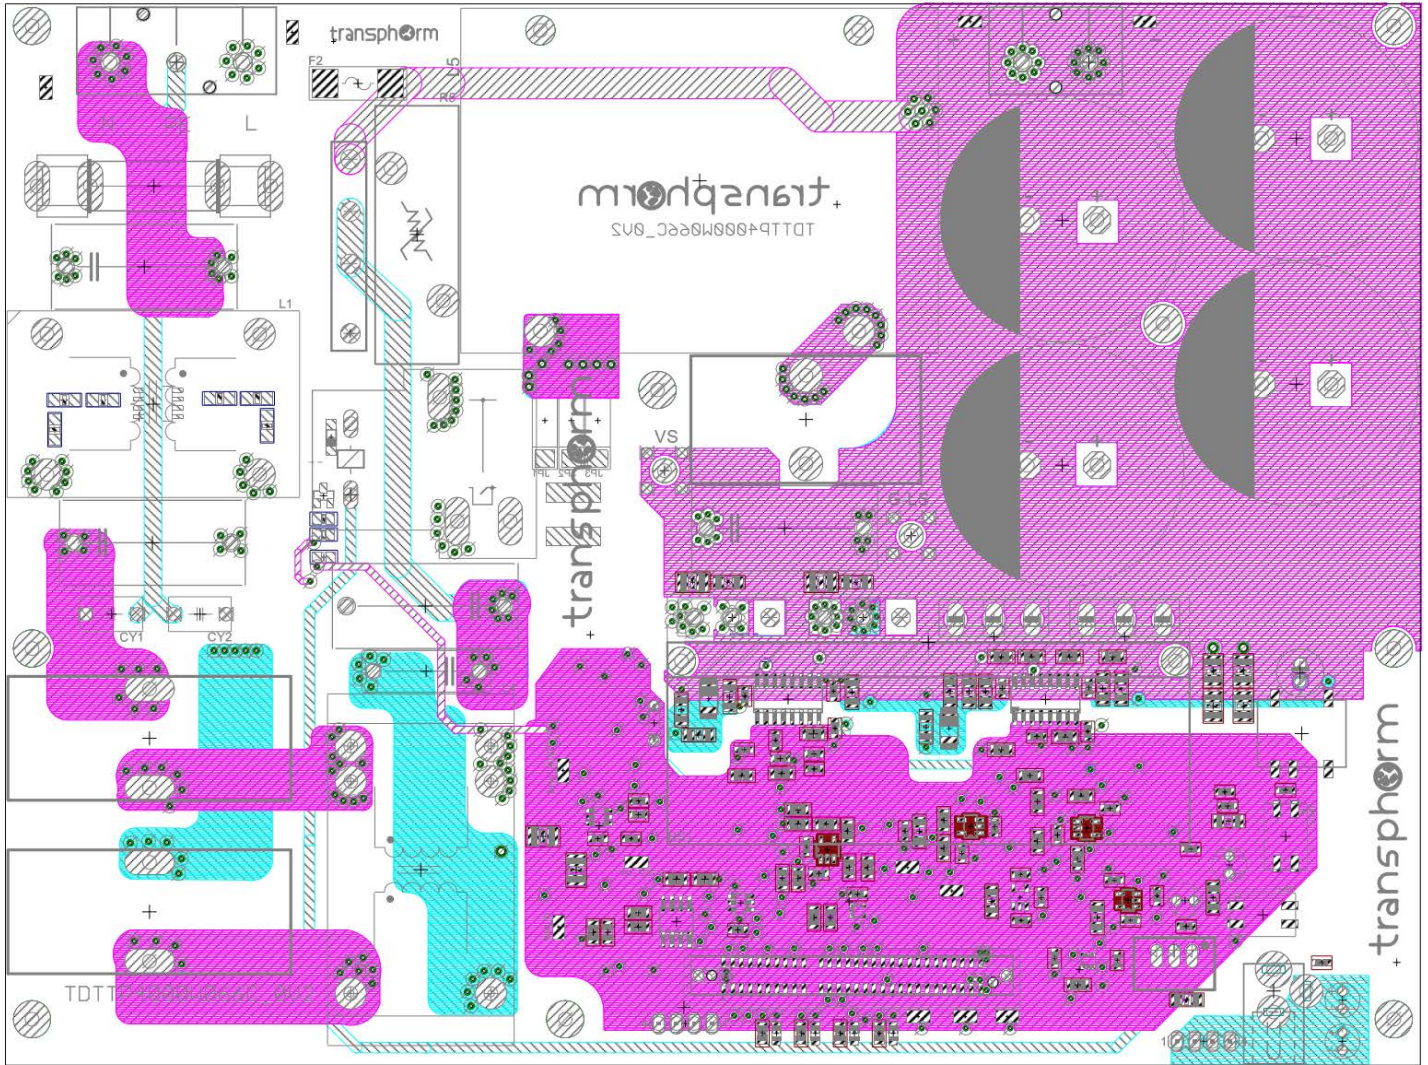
PCB inner layer 2 (ground plane) + inner layer 3 (power plane)
